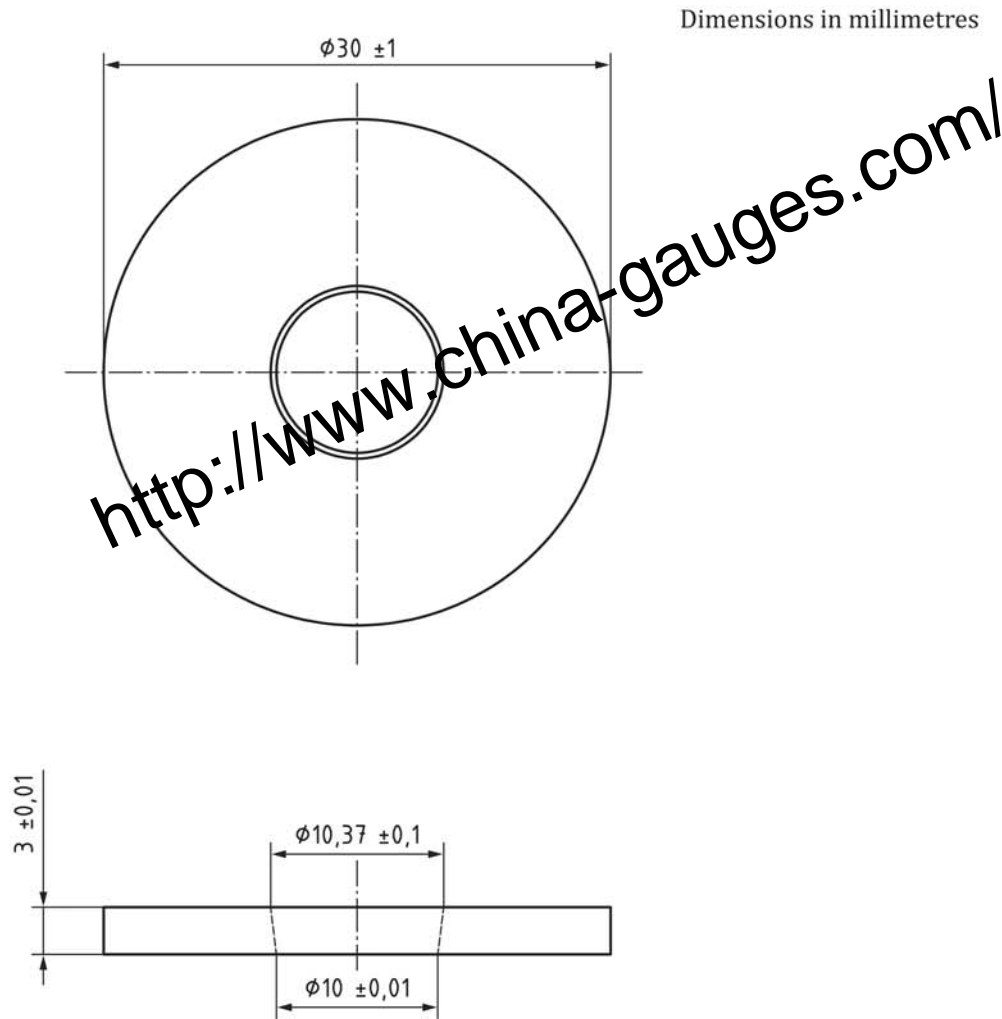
Mould to produce disc-shaped test-pieces for the Hertzian-loading strength-reduction corrosion test
